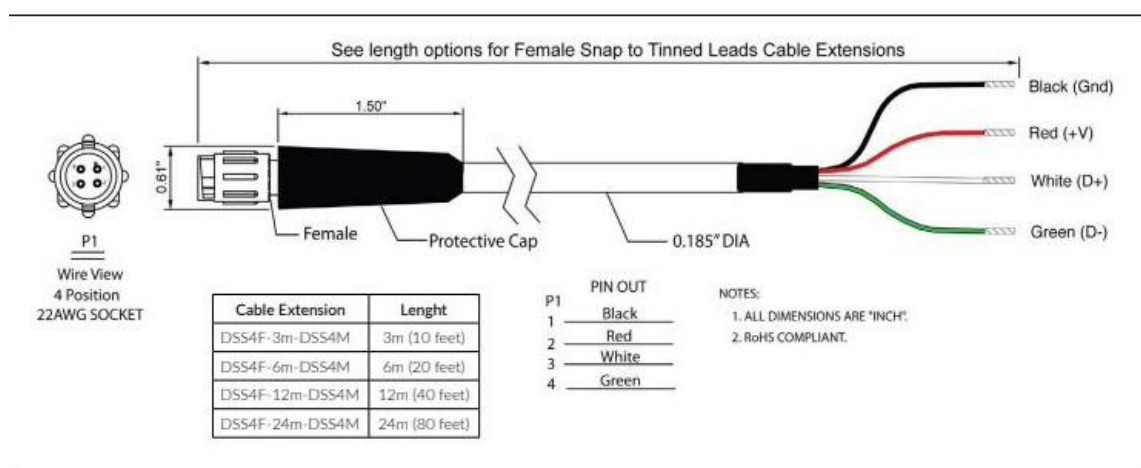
Female quick-connect to tinned-leads extension cable with wire view and colour-coded leads: Black (GND), Red (+V), White (D+), Green (D-).
